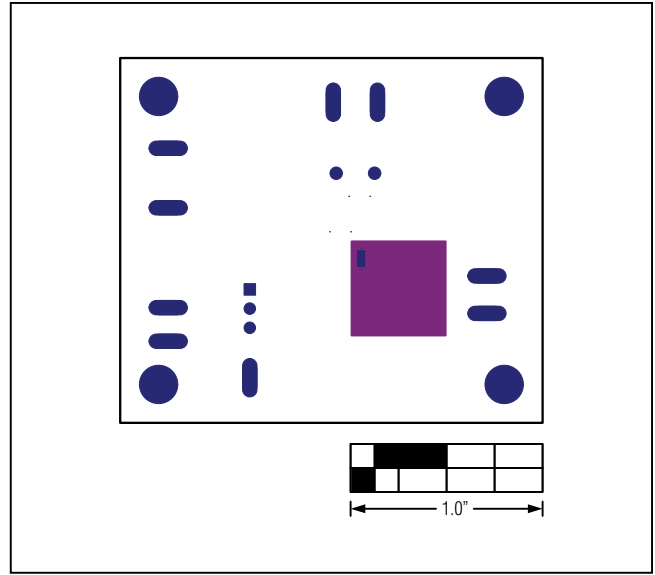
MAX17501A/MAX17501E EV Kits PCB Layout—Bottom Solder Mask
